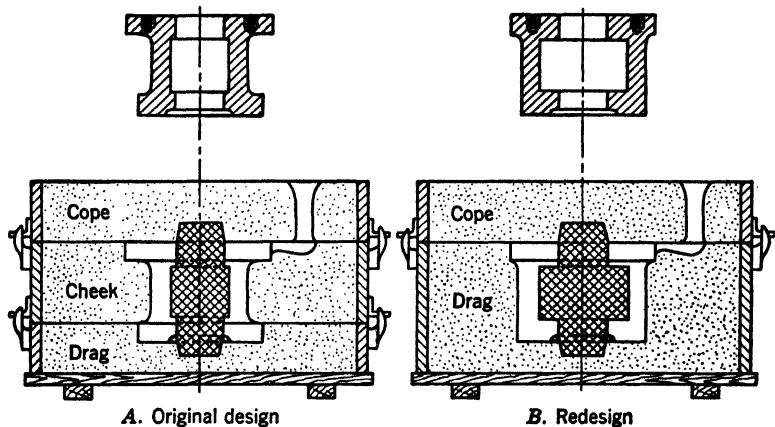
Redesign to change mold production from a three-part to a two-part mold.
